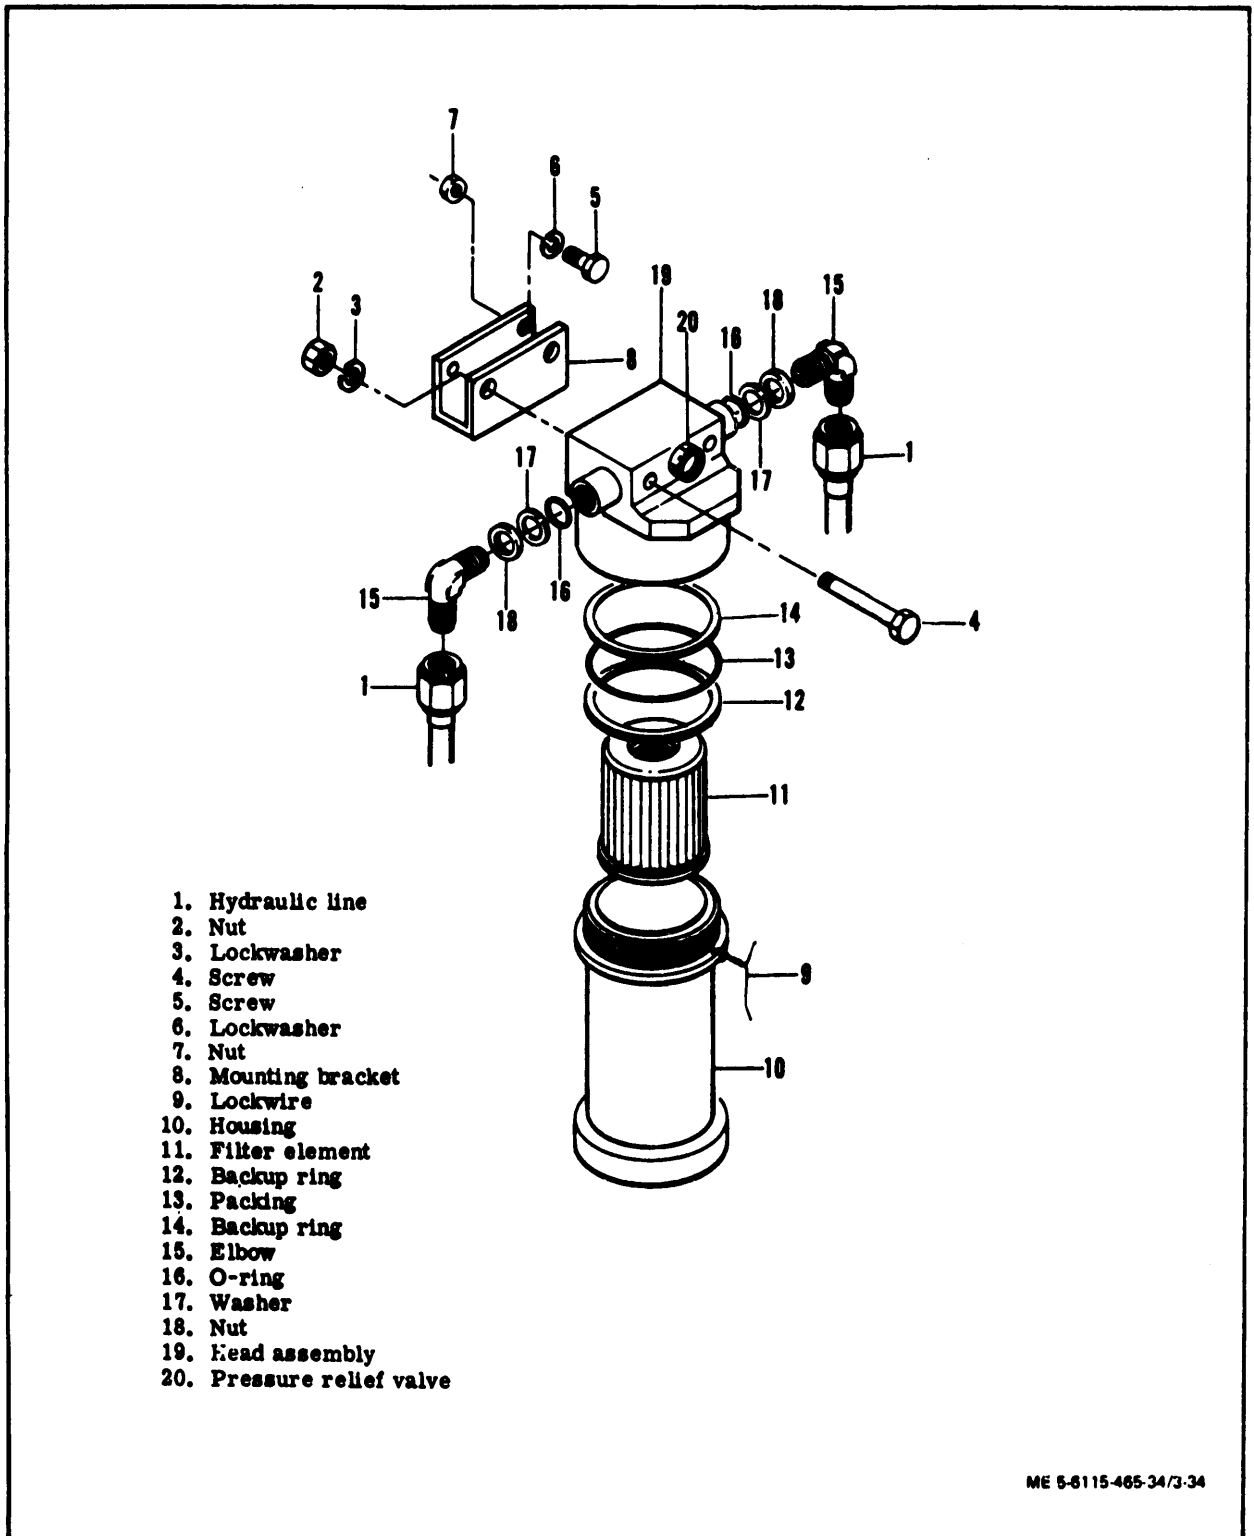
Hydraulic System Filter Assembly, Exploded View
